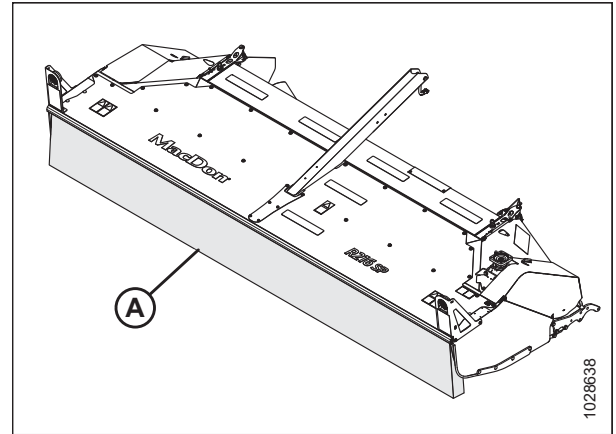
Cutterbar Curtain – Header with Conditioner Shown
